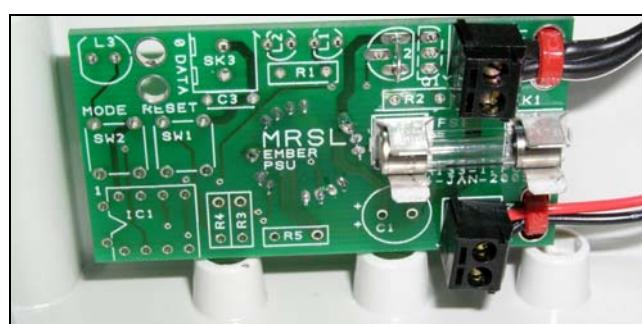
PCB for 'sparse' version without any microprocessor components. Note wire link across Q2 and cable ties securing flying leads. Also note the three mounting bushes below the PCB – hole in case must be drilled in the appropriate side of the case.
